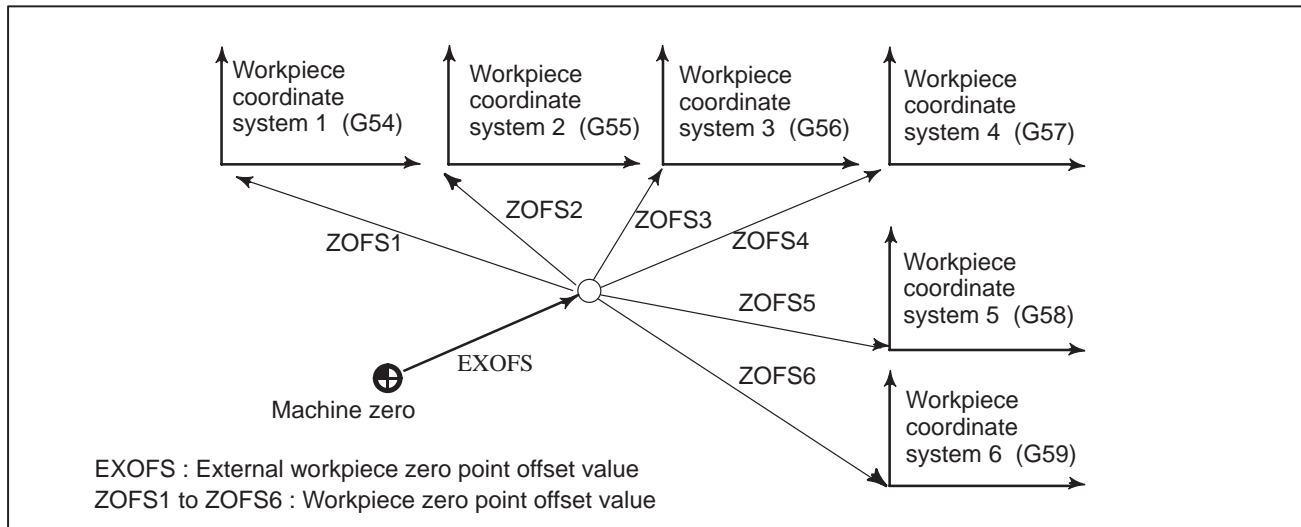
Changing an external workpiece zero point offset value or workpiece zero point offset value
